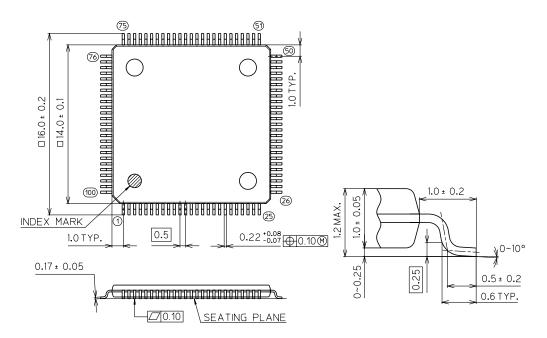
MSM6679AL-110 100-Pin Package Mechanical Drawing
